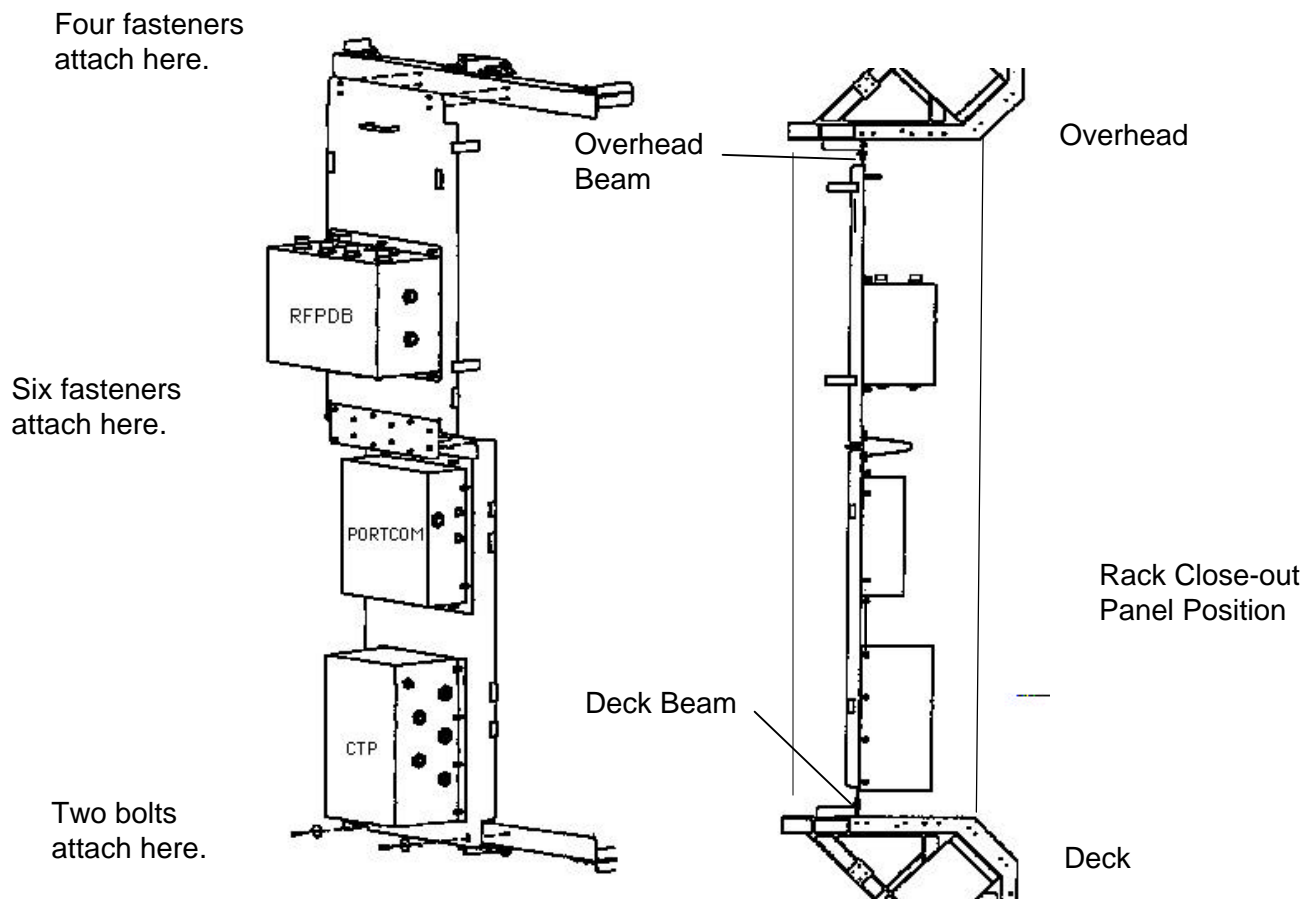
Exploded and installed side view of Early Comm Assembly.
